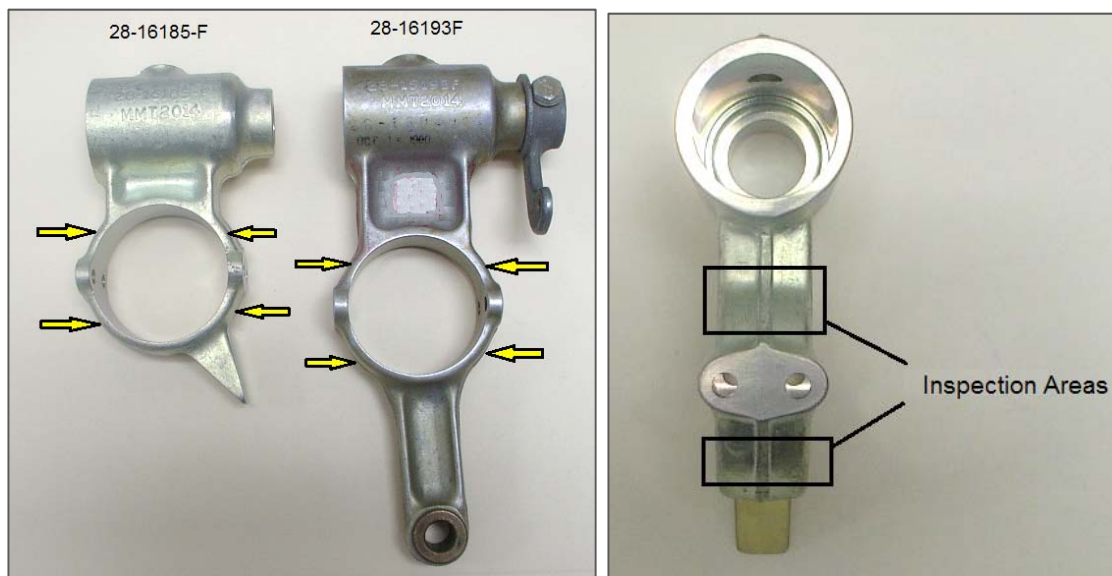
Collective Stick Socket Inspection Areas – Inspect for cracks on the surface between the edges of the torque tube hole.
